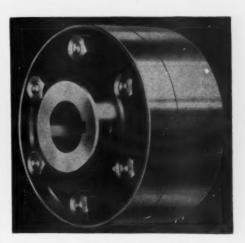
Assembled view of flexible coupling shown in Fig. 89
